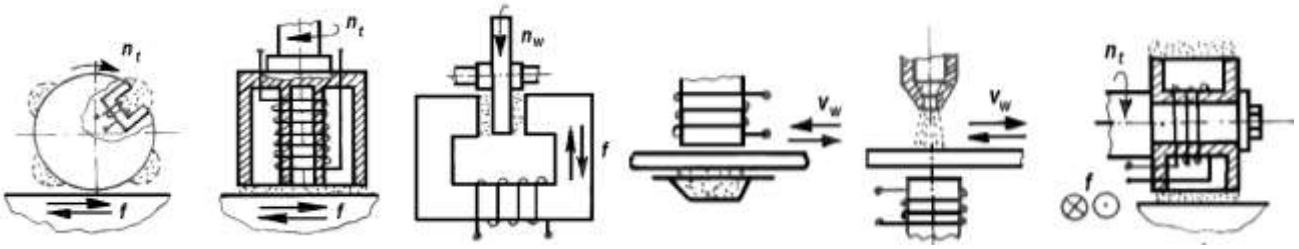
Magnetic abrasive machining of plane surfaces (adapted from [2, 3, 4, 8, 76])
